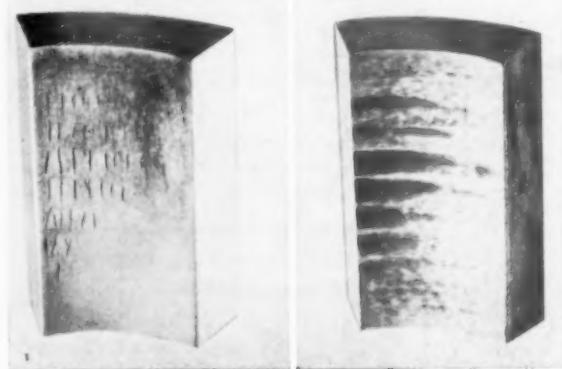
(left) shows portion of hardened bushing cracked during grinding. Etching (Fig. 1b, right) brought out burn streaks.
